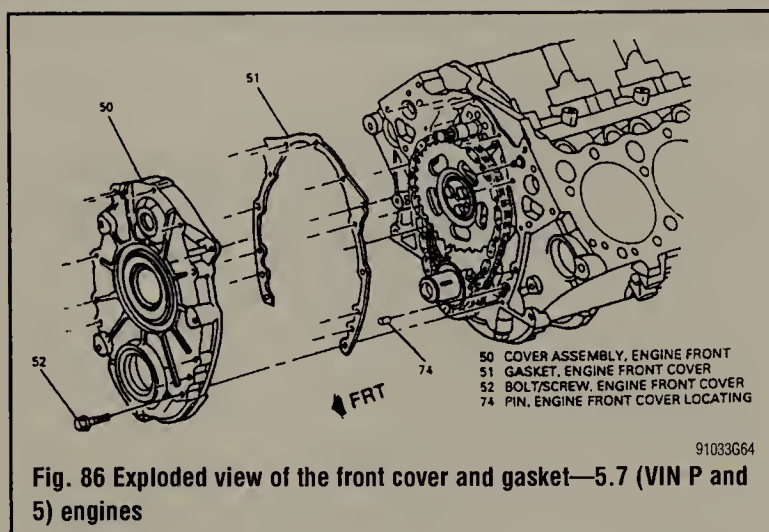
Exploded view of the front cover and gasket—5.7 (VIN P and 5) engines
